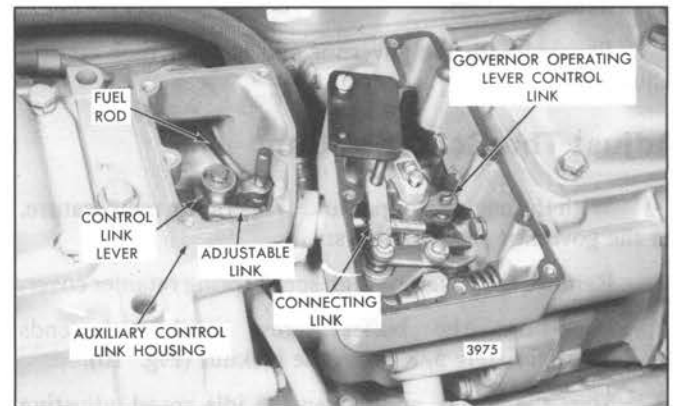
Positioning Control Link Levers with Tools J 21779 and J 21780
